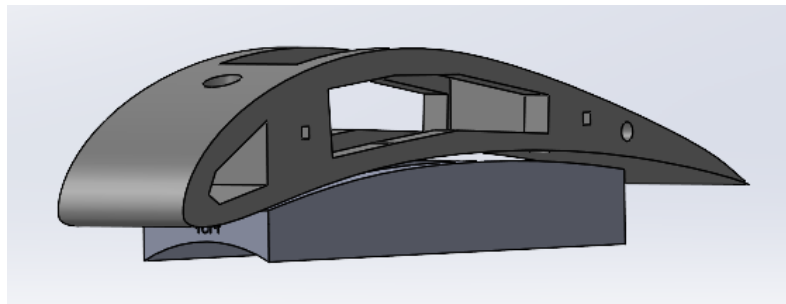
MOUNTING AIRFOIL AND MOUNTING PLATE
